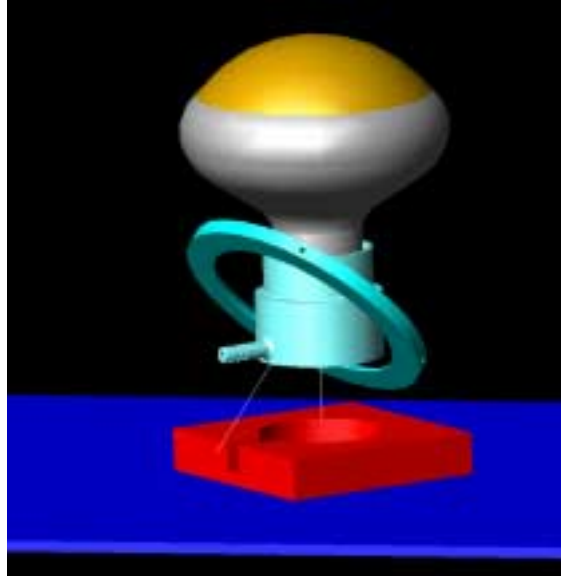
Fig.-47: Initial phase of the assembly of the PMT to the mechanical support pieces
